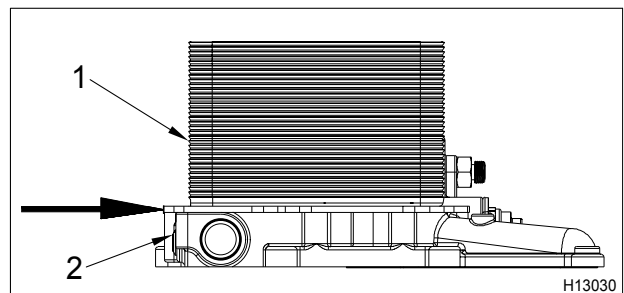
Separation of cooler heat exchanger from oil cooler housing base
